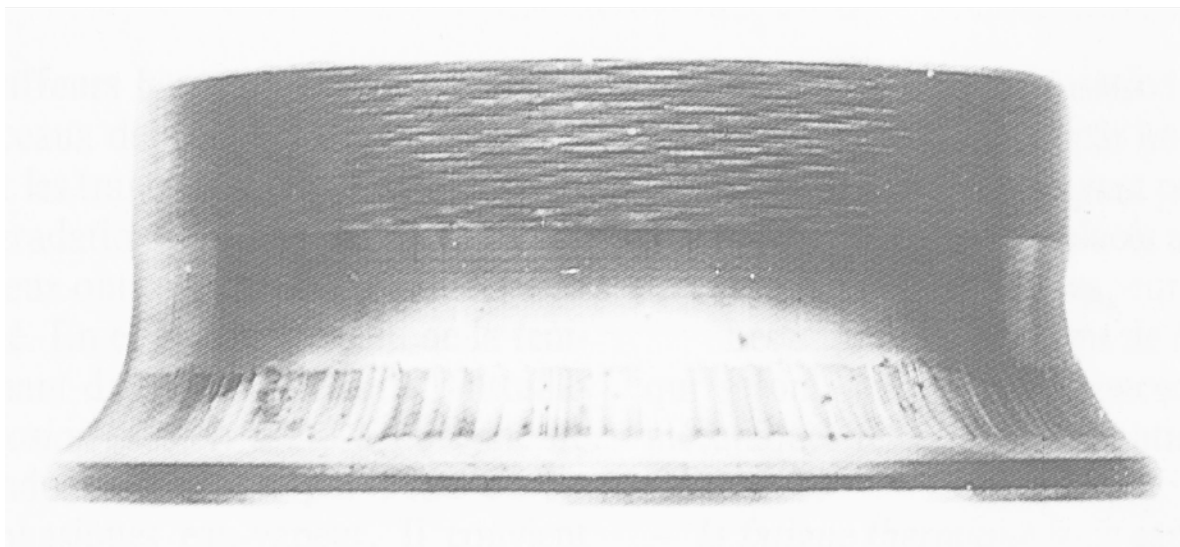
View of the grooves on the lower track of a bearing [Mousset, 1990].
